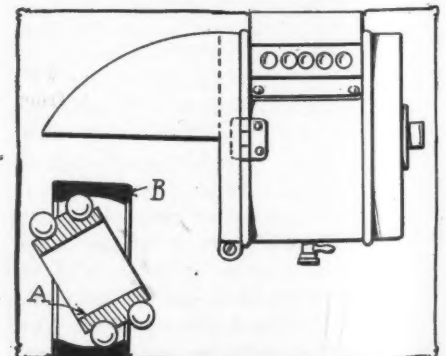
WINGQUIST SELF-ALIGNING BEARING AND LEWIS LAMP HOOD
